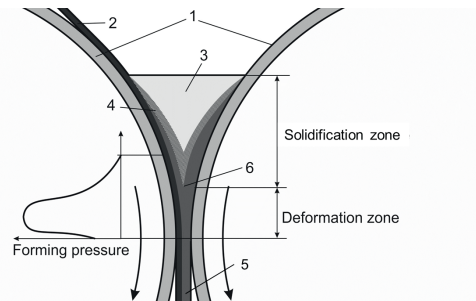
Principal scheme of the twin-roll casting of aluminium-steel clad strips: 1 – water-cooled rolls, 2 – steel strip, 3 – aluminium melt, 4 – semi-solid aluminium, 5 – solidified clad strip, 6 – kissing point.
